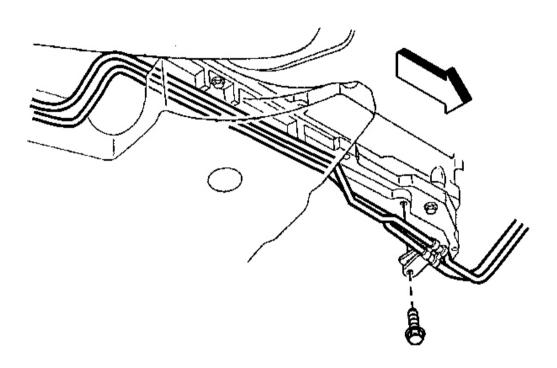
TOC Front Pipe, Front Retaining Clamp & Bolt Courtesy of GENERAL MOTORS CORP.
